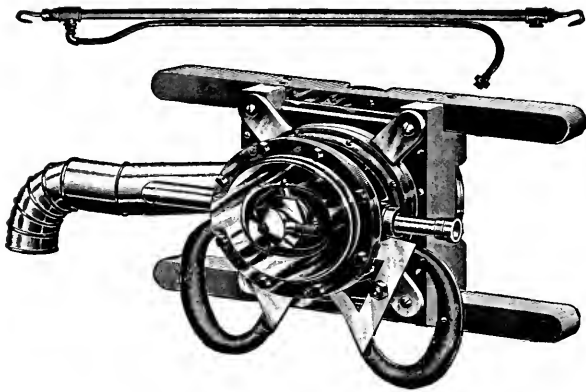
SAND-PAPERING MACHING OPERATED BY COMPRESSED AIR.
